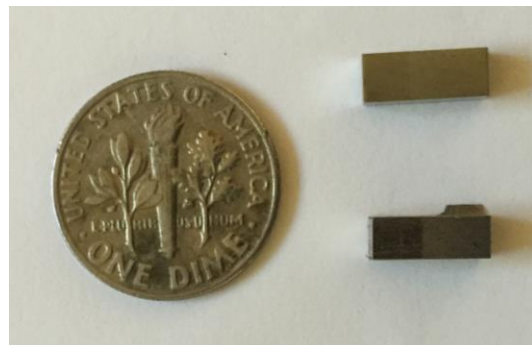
Specimen Samples, Lapped with 220-800 Grit Abrasive Paper (Top), as Machined (Bottom).
